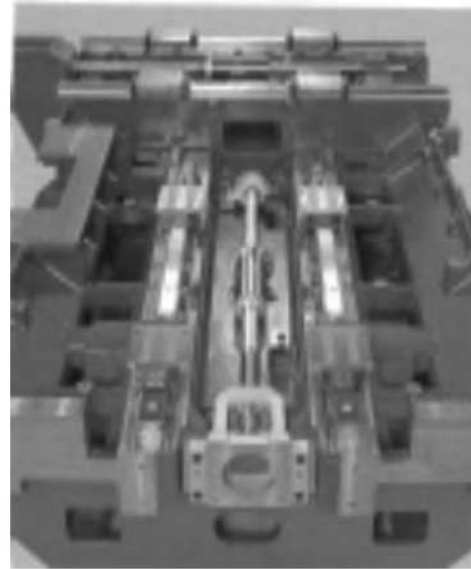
Use of recirculating ball screw and the LM device for axis movement in the bed of a CNC machine tool (Courtesy, Makino Milling Machines Co. Ltd., Tokyo, Japan)
